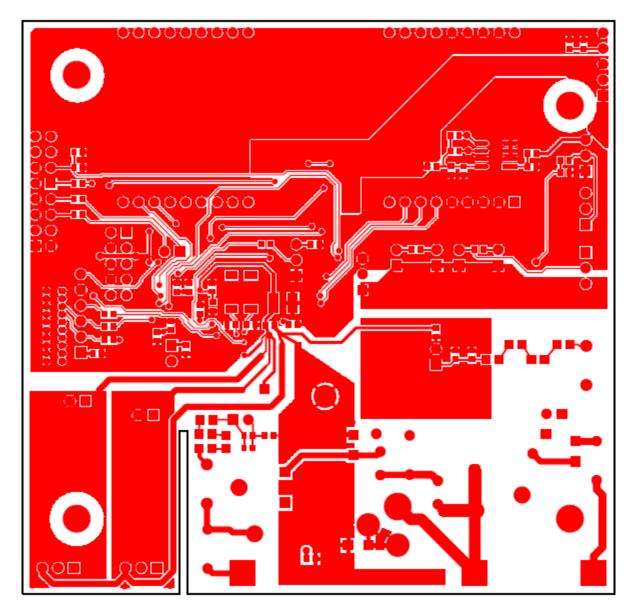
71M6531N12A2 Demo Board: Bottom Copper Layer – Bottom View
